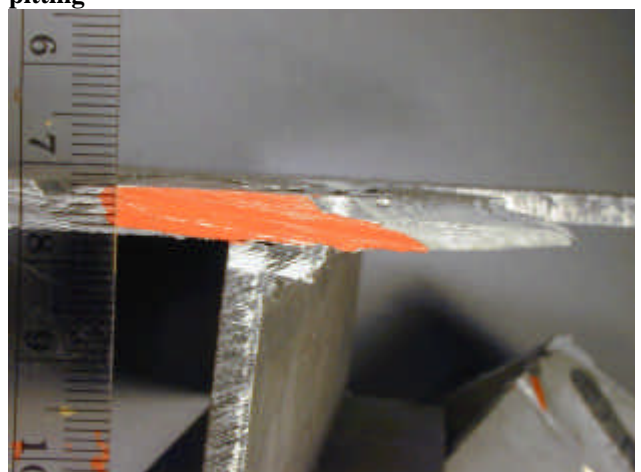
M/V *JET CAT EXPRESS* - Fracture in Fig. 6 viewed from the side
